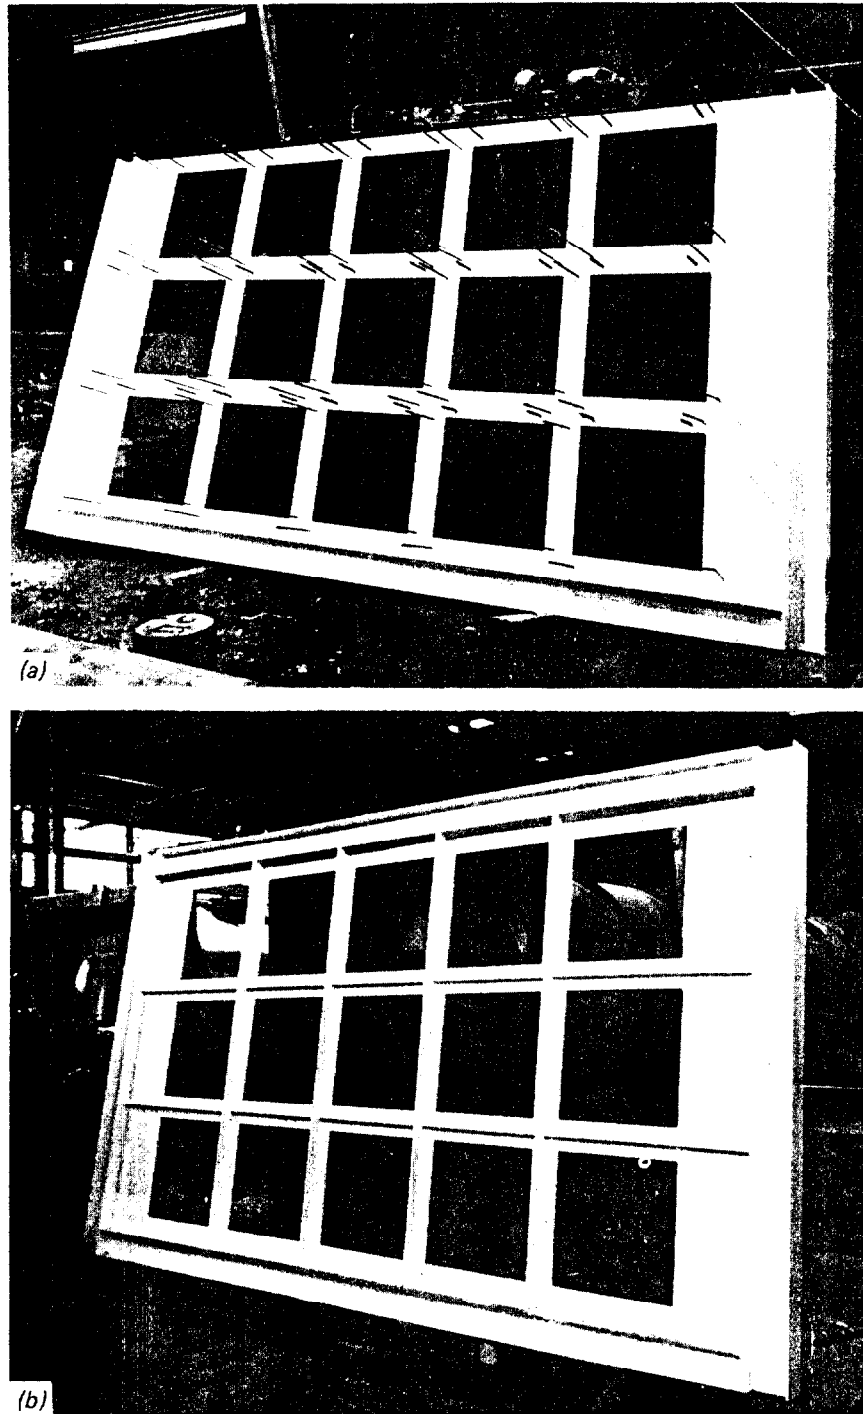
HEPA filter mounting frame made from a single $\frac{3}{8}$ -in. plate during fabrication in manufacturer's shop. Openings are torch-cut, then finished by machining. "Picture frame" made from I-beams reinforces housing in addition to providing rigidity to frame itself. (a) Front; (b) rear; note reinforcing bars skip-welded to single plate. Courtesy CTI-Nuclear, Inc.
